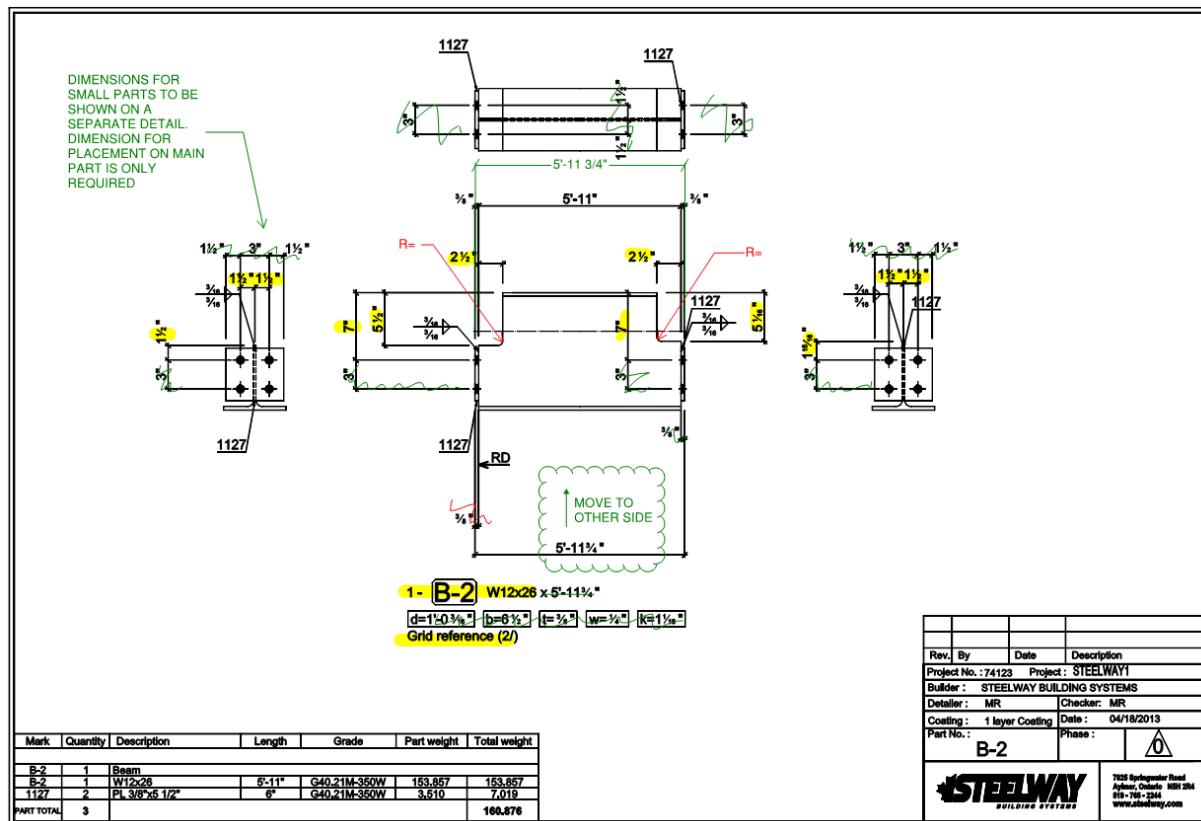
Marked-up fabrication drawing to show changes required in drawing style
